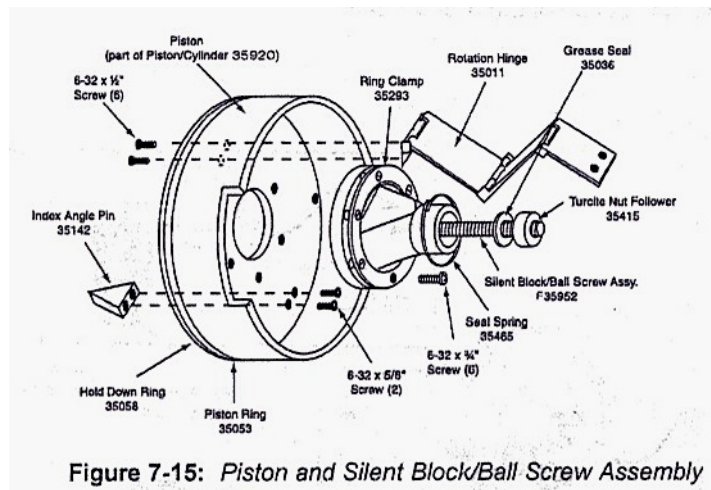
Piston and Silent Block/Ball Screw Assembly
